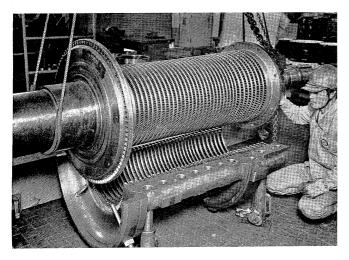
Stationary blade holder and rotor of pot type turbine (for chemical fiber plant) 14,400 kw backpressure turbine 119 kg/cm²g 535°C backpressure 18 kg/cm²g 3000 rpm
